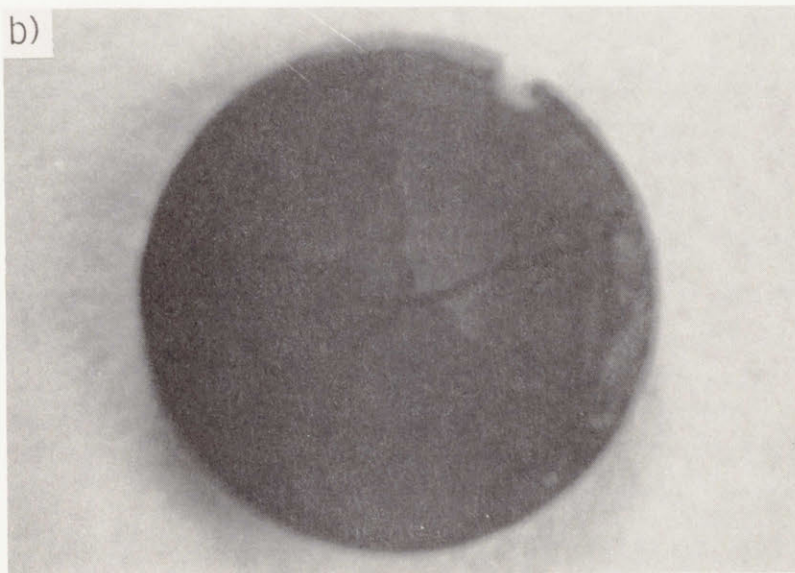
Typical brittle fracture surface at about 22 X showing radial cracks initiated at the disk center.
